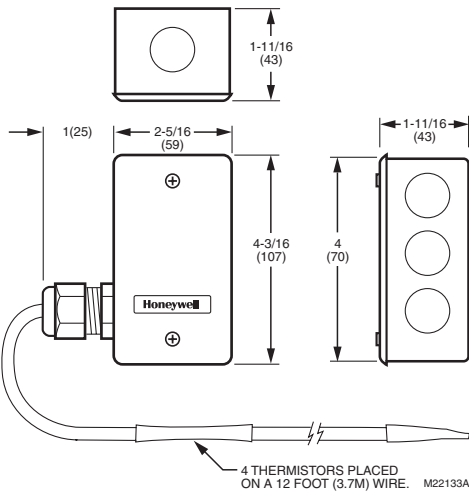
C7021J, C7023J, C7031J, C7041J Dimensions in Inches (mm).
